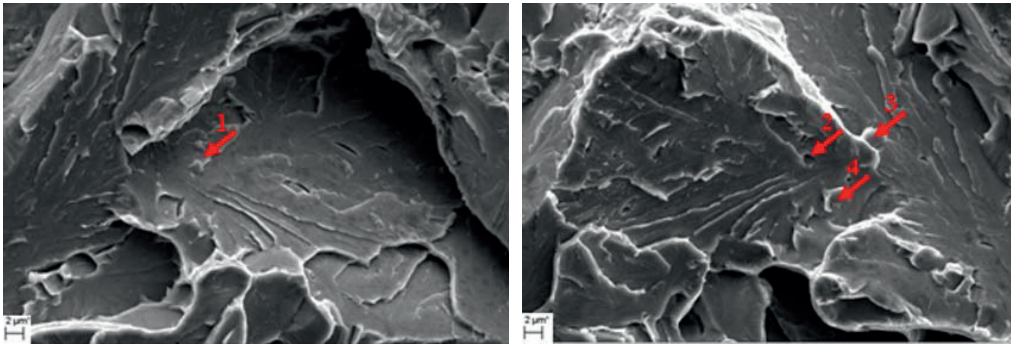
Opposite fracture surfaces of the specimen CTOD tested at -60°C.
